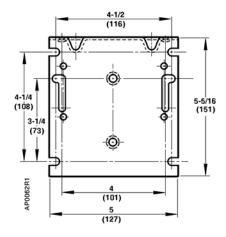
Mounting Bracket Dimensions. Dimensions in Inches (Millimeters).
